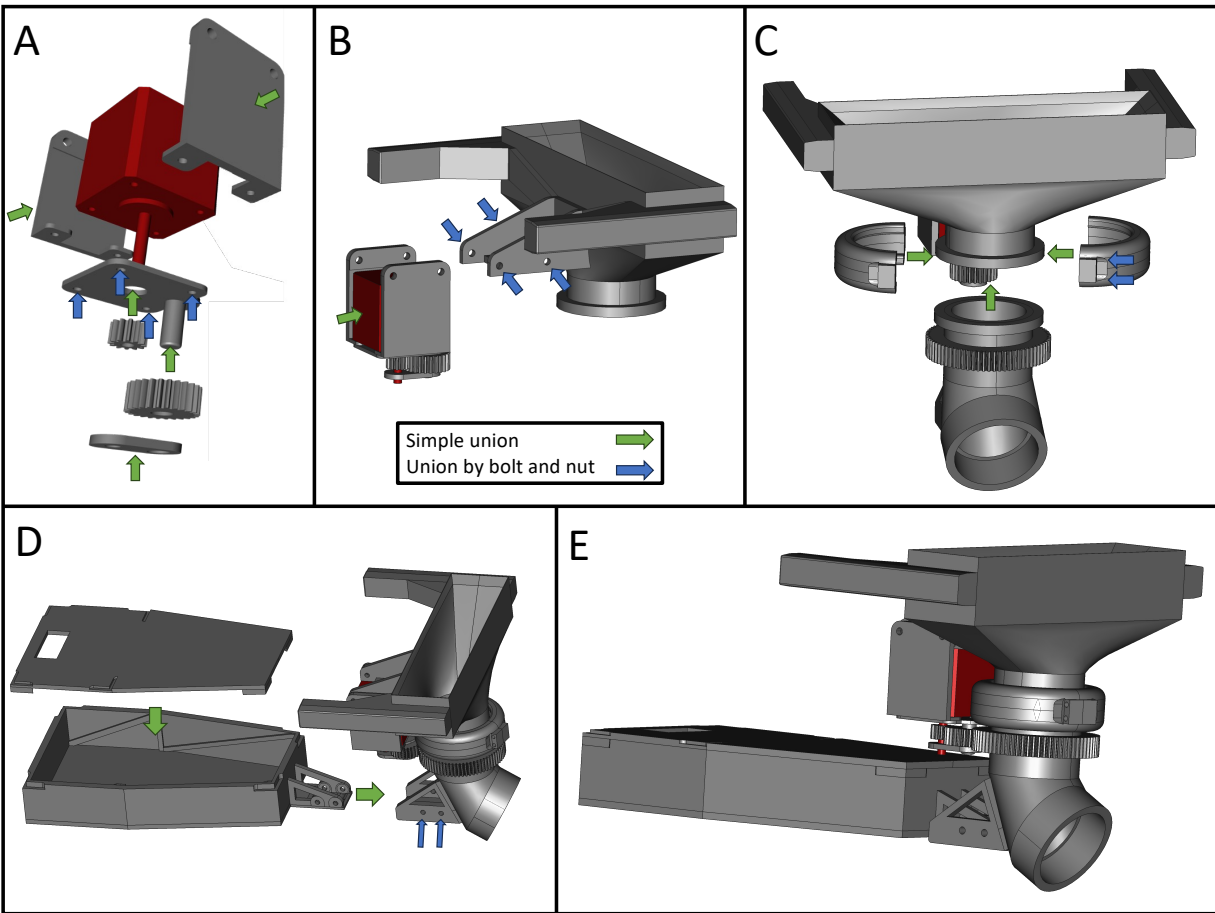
Assembly of the upper joint. A) Place the two NemaMount parts around the Nema17 motor. Then, secure the IdlerLink using 4 M3x10mm screws. After that, introduce the 1mmPinion in the motor shaft and the 1mmIdler in the IdlerLink shaft. Lastly, Introduce the IdlerCap. B) The motor assembly can then be joint to the TopFunnel using 4 M4x16mm screws. C) Use two HalfClamps to join the TopFunnel with Elbow1 using 4 M3x25mm screws. D) The CircuitCase and its Cover can be joined to Elbow1 using 4 M4x16mm screws. E) Full upper joint assembly.
